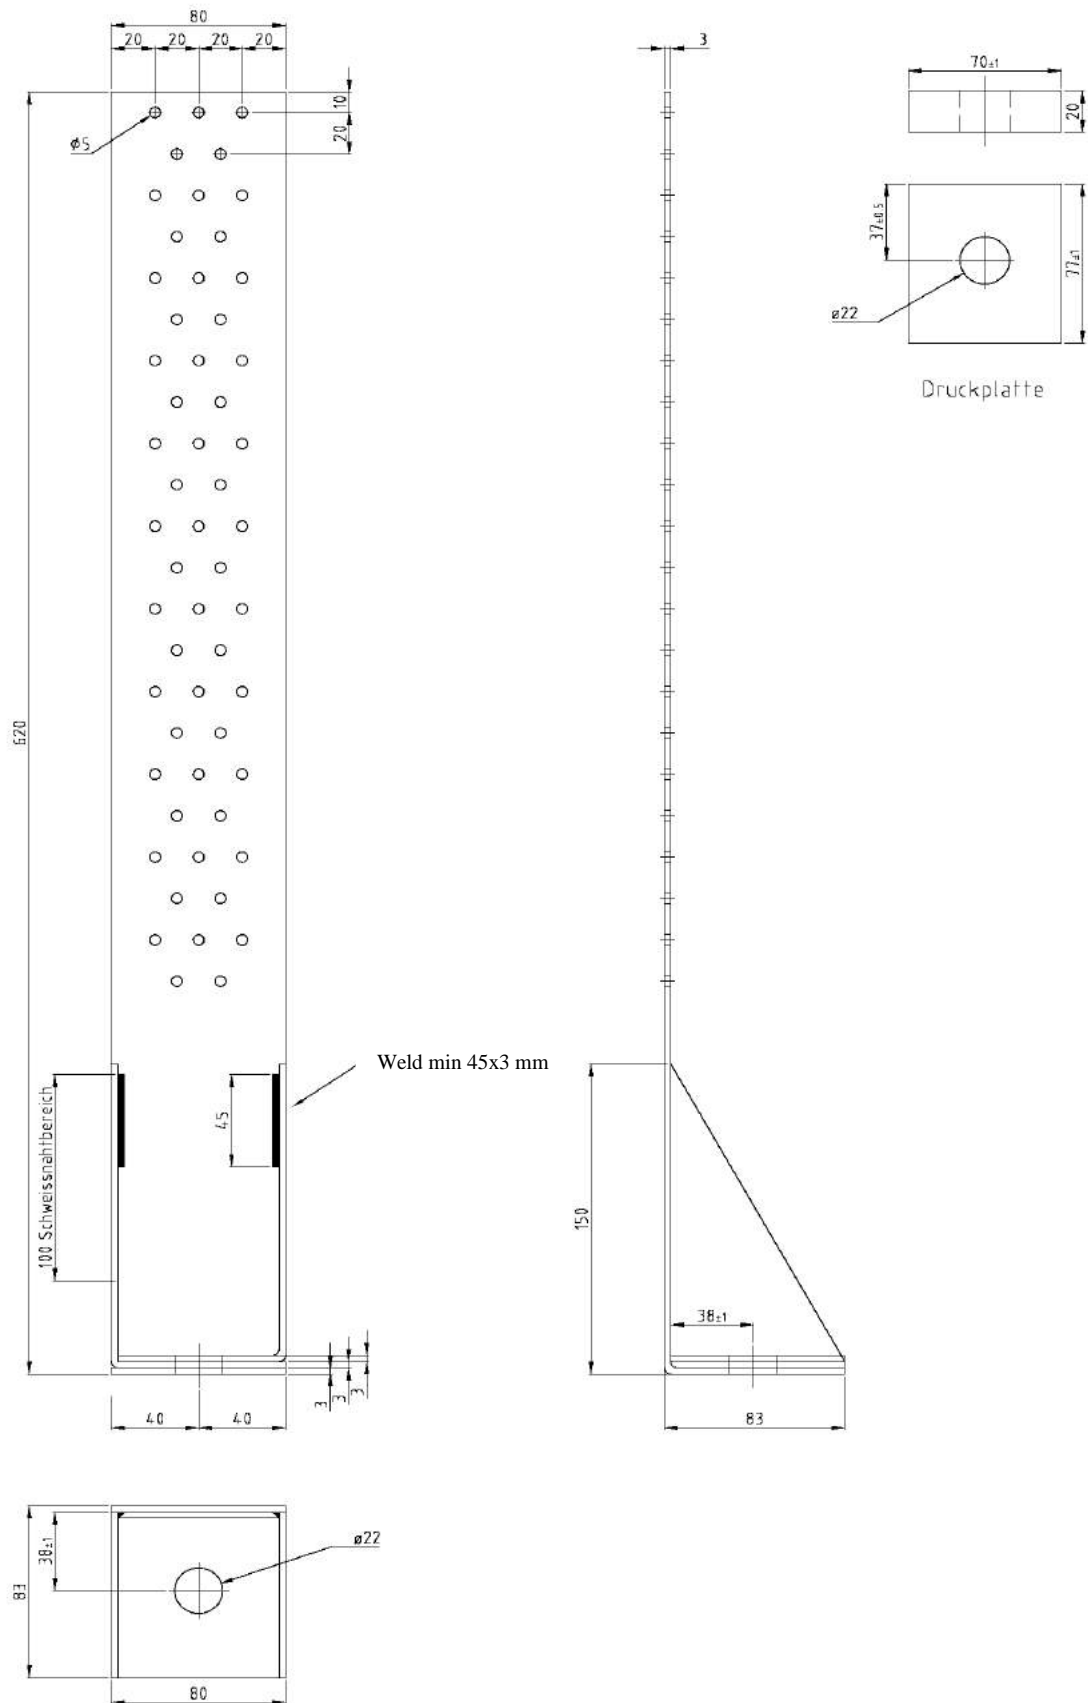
Dimensions of type WHT620 (drawing with washer 77x70x20)
